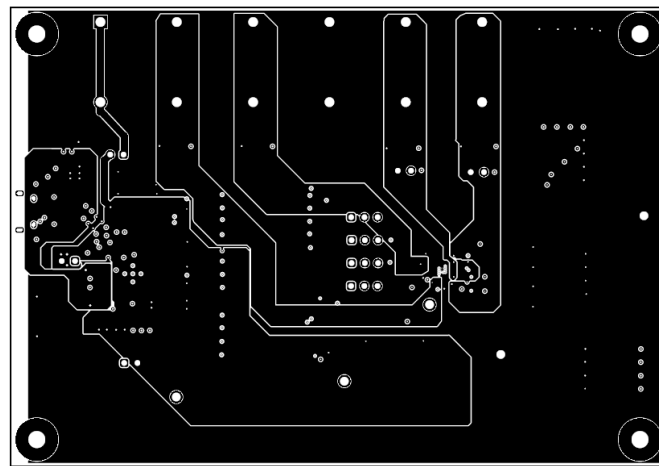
AMC6V704EVM PCB Mid Layer 2 Layout (Power Layer)
